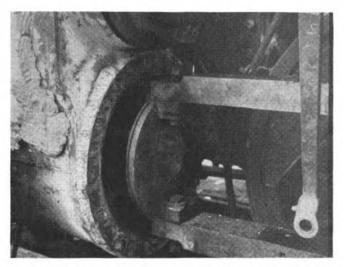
Method of welding the back head to the cylinder of a locomotive at Milwaukee shops
